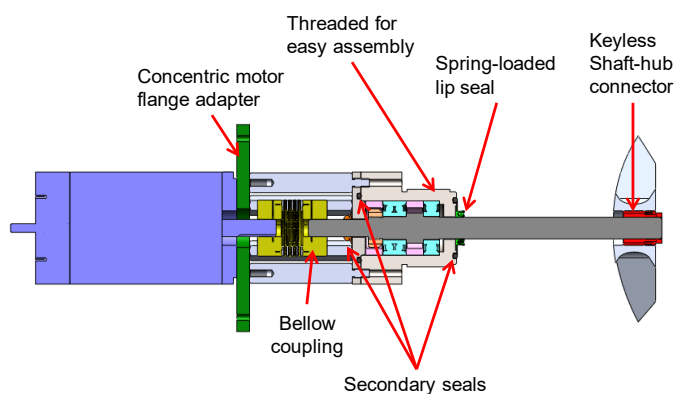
Schematic view of the impeller and shaft coupling and entire assembly.
